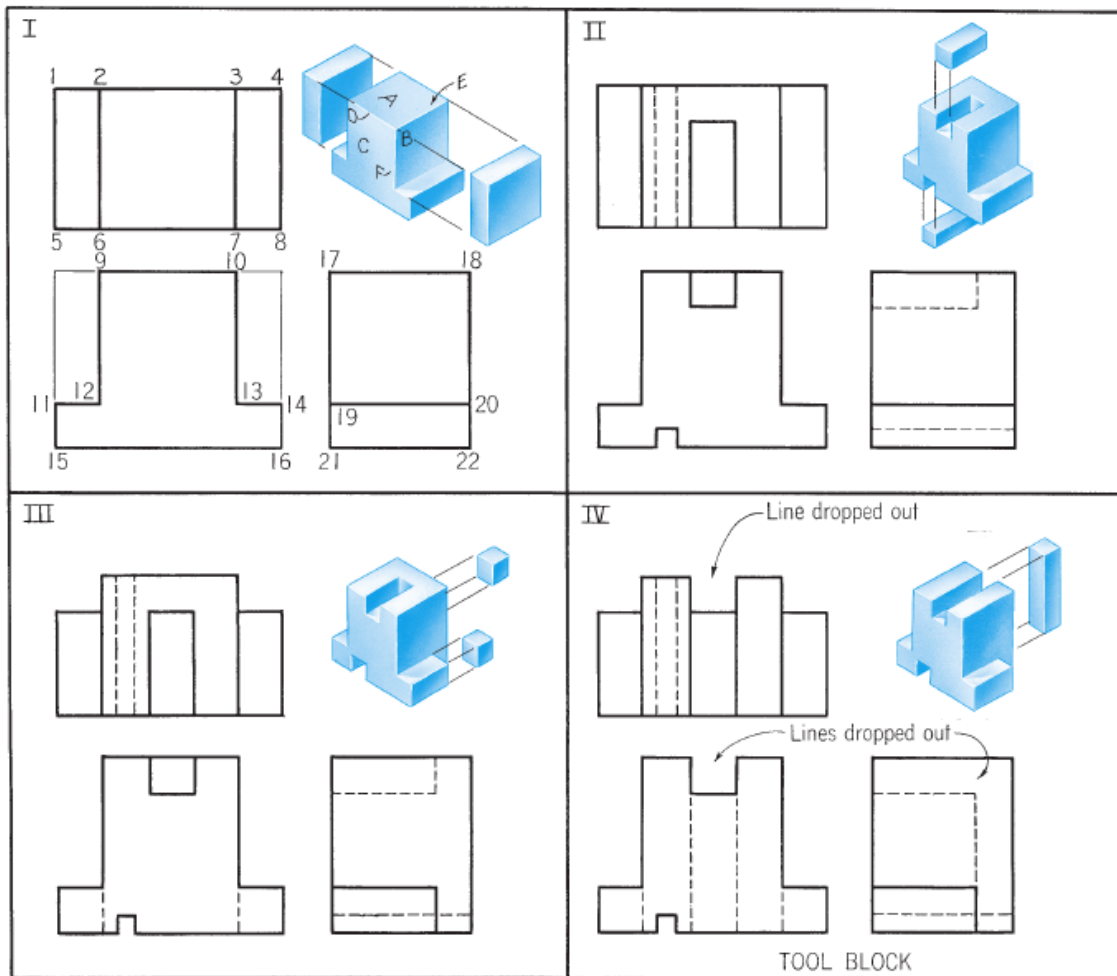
Machining a Tool Block—Normal Surfaces and Edges.
